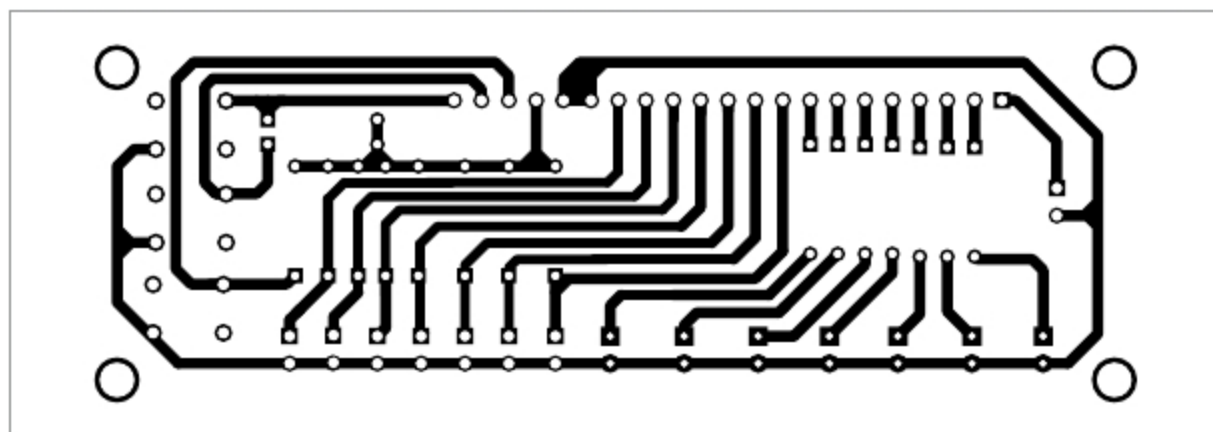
Actual-size PCB layout of the window alarm annunciator
